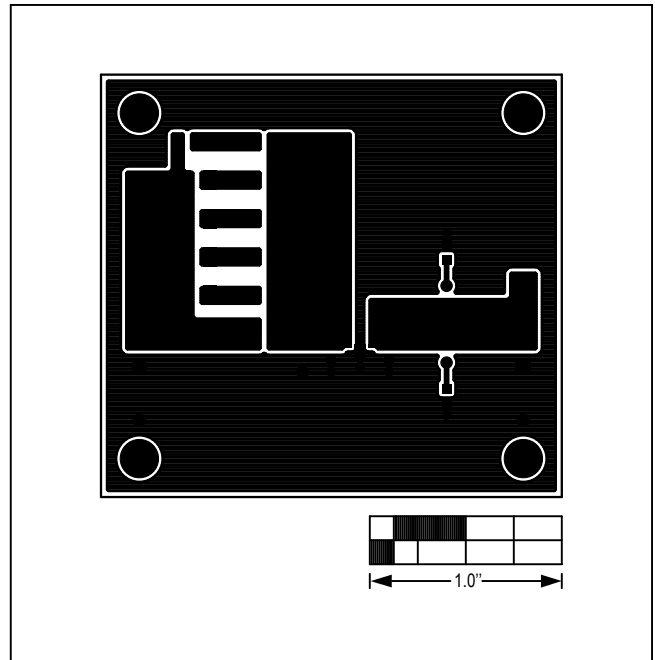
MAX14626 EV Kit PCB Layout—Component Side
